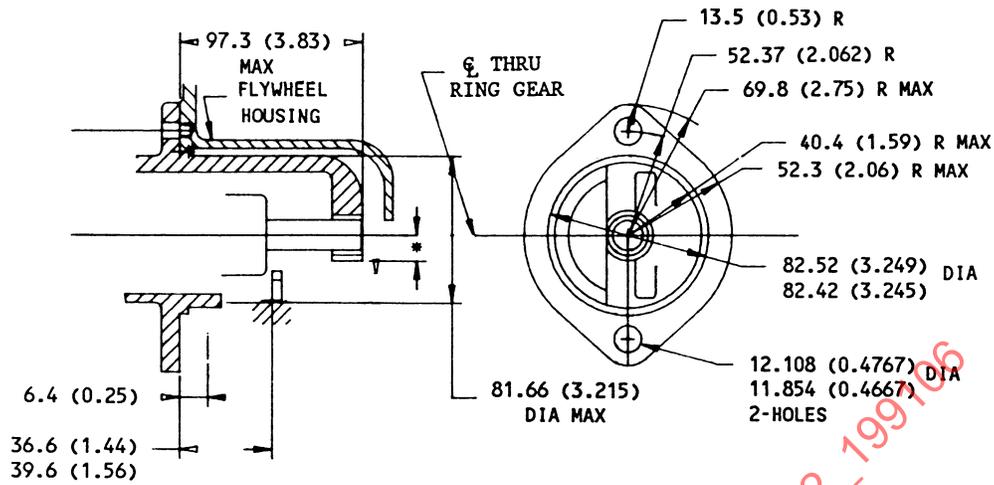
TYPE NO. 4 MOUNTING FLANGE LIGHT DUTY
